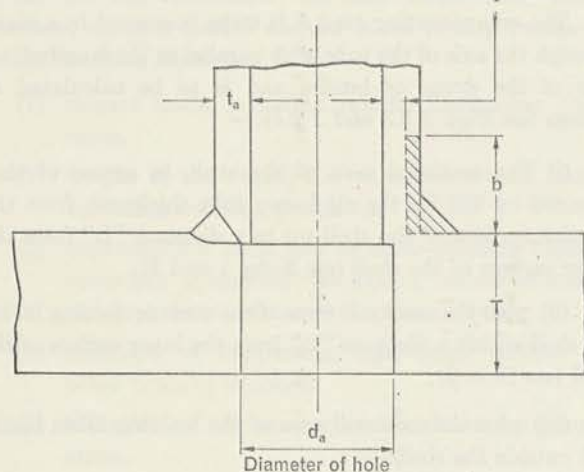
COMPENSATION OF WELDED TUBE STUBS
